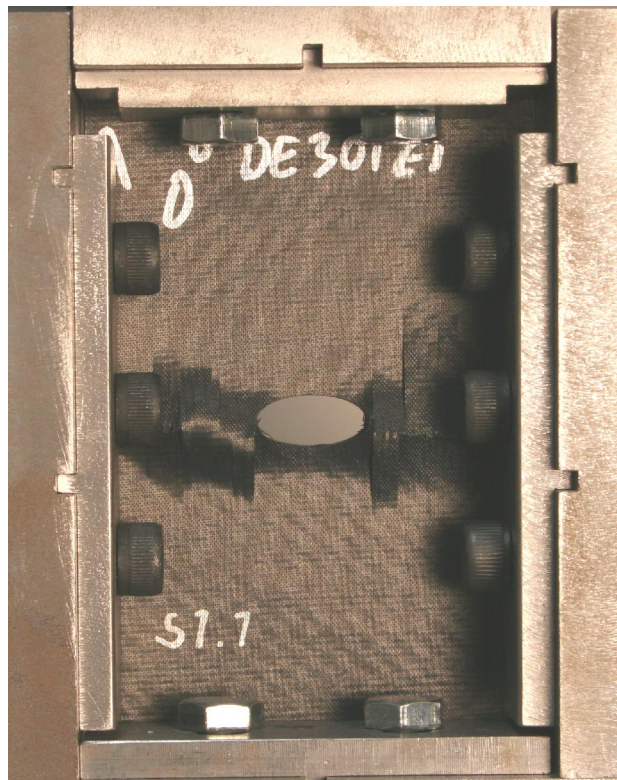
Typical failure of specimen with elliptical open hole. Courtesy of TKK/KRT.
